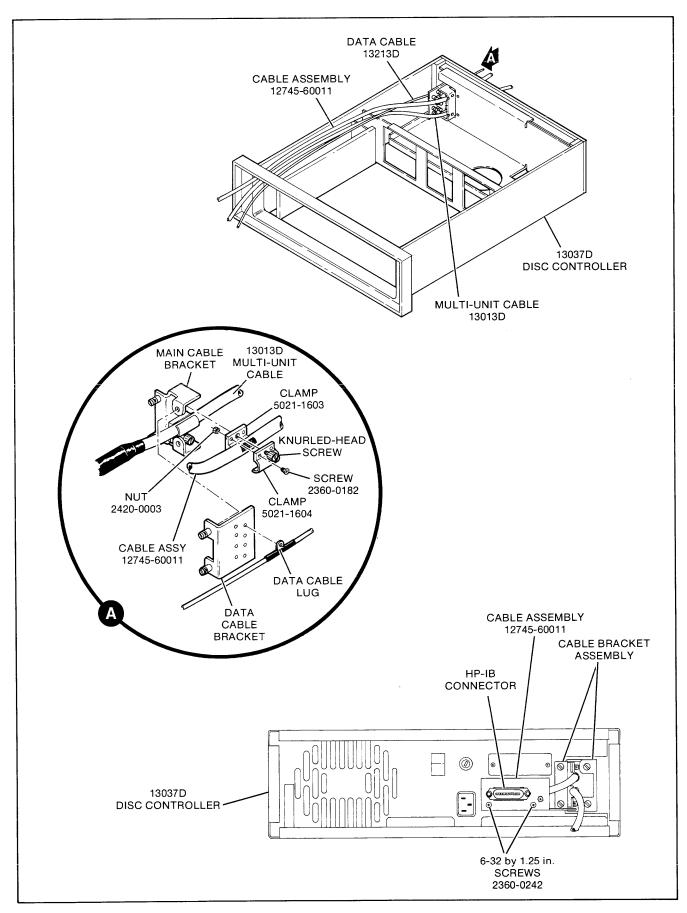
Cable Assembly (12745-60011) Installation in HP 13037D
